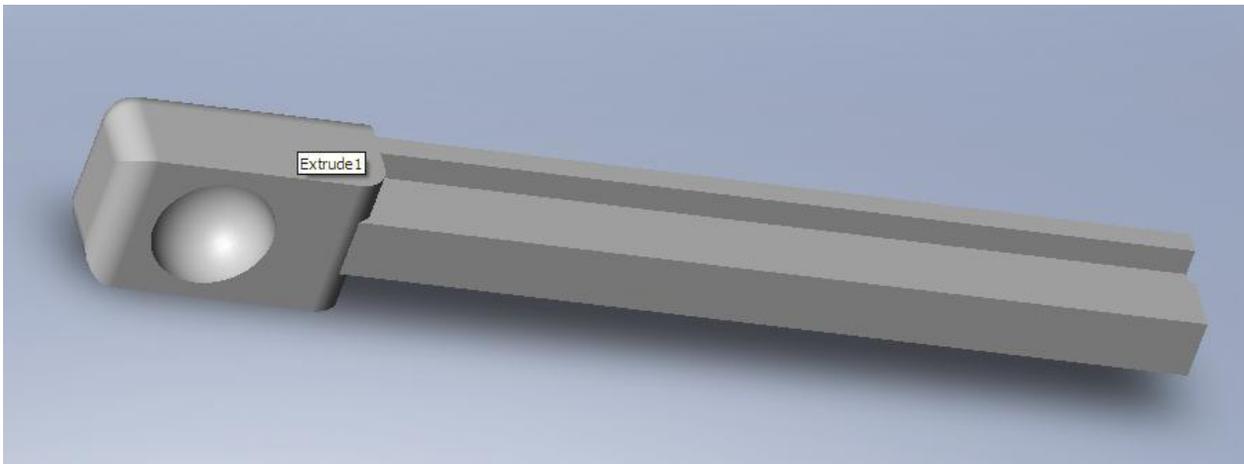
CAD drawing of clamp depicting interfaces on both sides of the clamp
